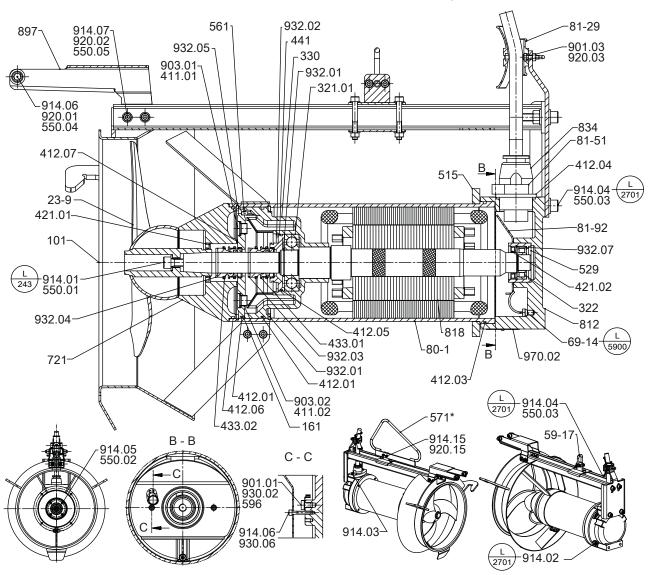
General assembly drawing: a) with shackle b) with bail (optional)
